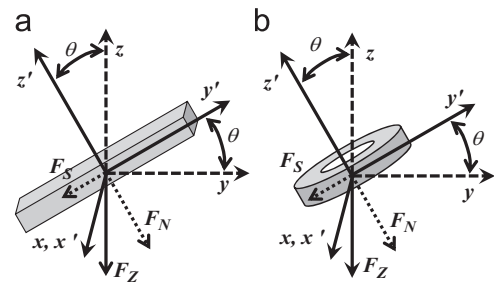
Decomposition of the applied loads on a laser weld into a normal and a shear component at a loading angle of  $\theta$ : (a) stitch-type laser laser welds; (b) O-type laser welds.
